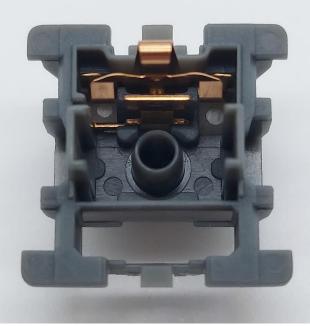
Holy Panda X bottom housing internals showing mold ejector circles, padded bottoming out region, and south side spring collar.
